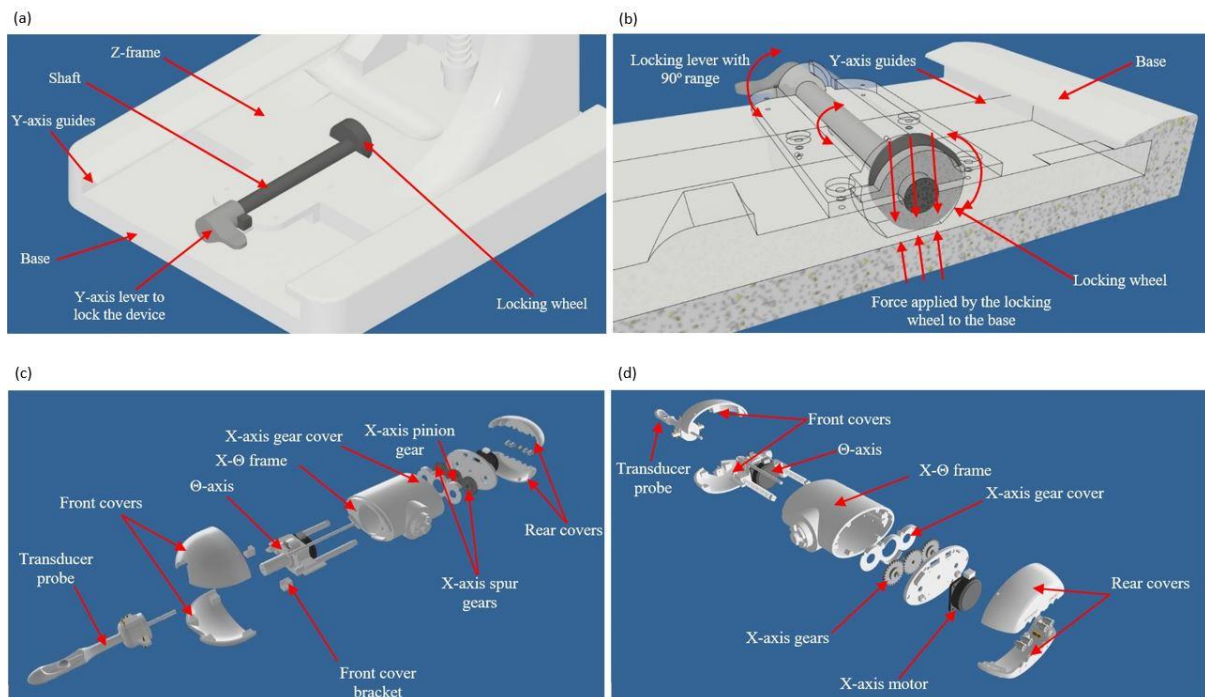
a) Y-axis mechanism with the locking mechanism, b) Y-axis mechanism cross-section with transparency to demonstrate the mechanism in detail, Exploded view of the PC controlled axis c) front view, and d) rear view.
